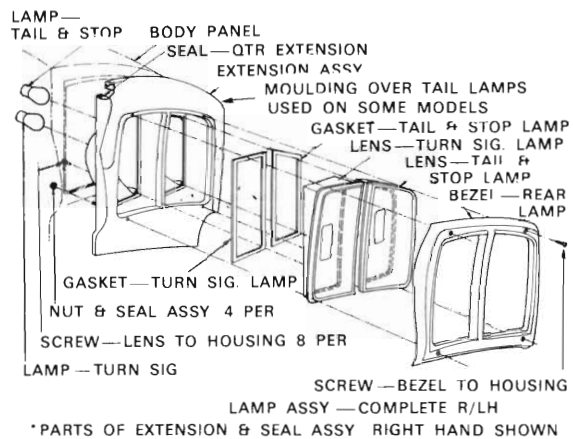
Tail lamp assembly, sedan models (disassembled view)
